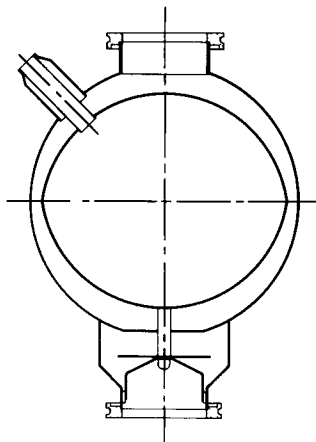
Cross-section of part of the jet assembly of a large diffusion pump (Leybold DI 30 000)
